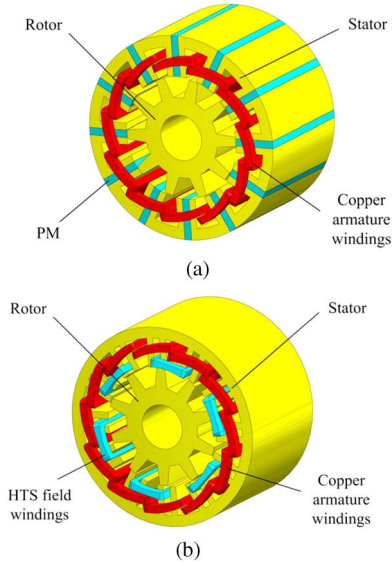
Machine configuration: (a) FSPM machine and (b) proposed HTS-FS machine.
